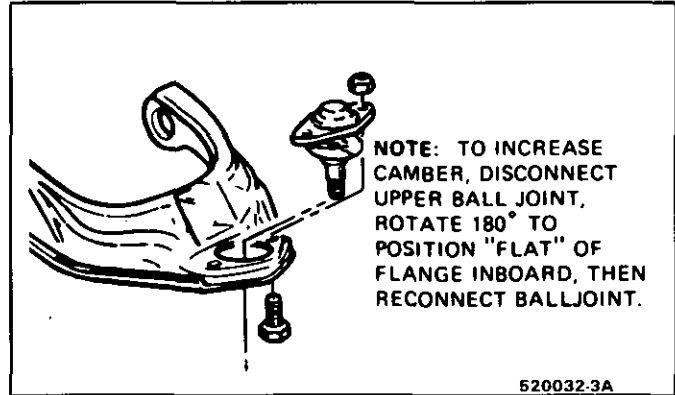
Upper Ball Joint/Camber Adjustment (Front)
